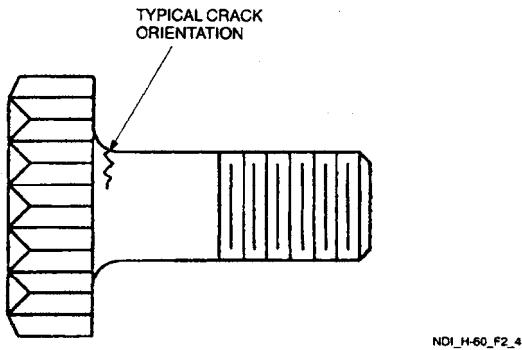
Nonferrous Rotor System Bolts and Pins
